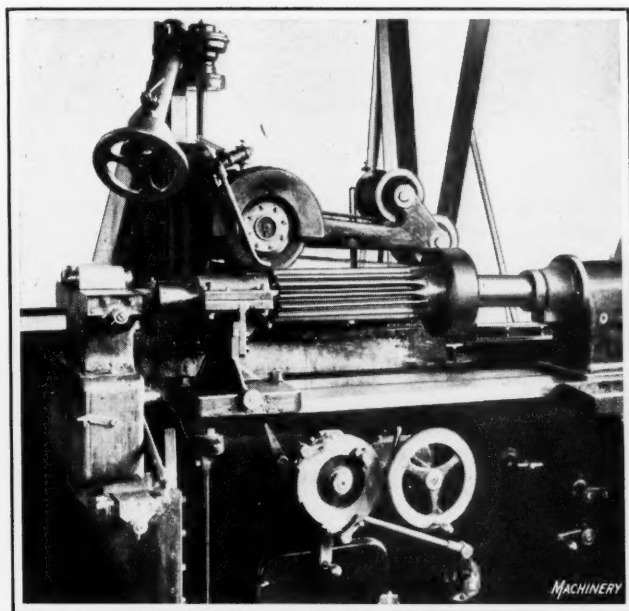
Gear-tooth Grinding Machine of the Formed-wheel Type
